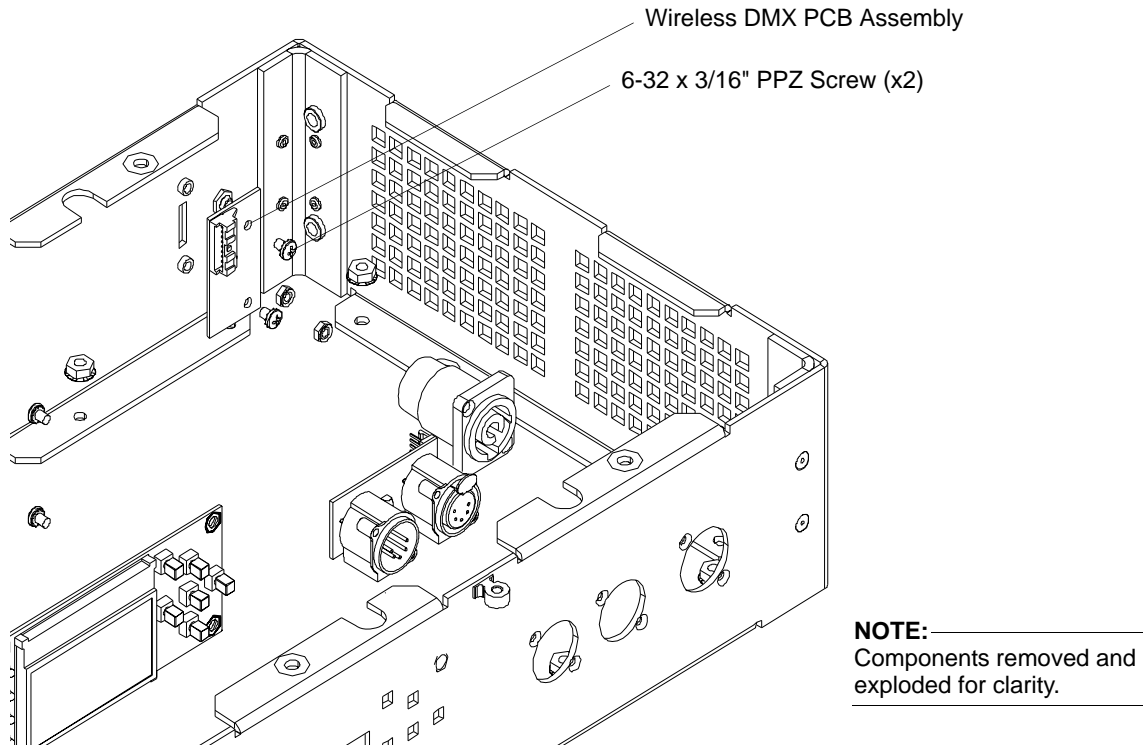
Wireless DMX Interface PCB Assembly Removal
